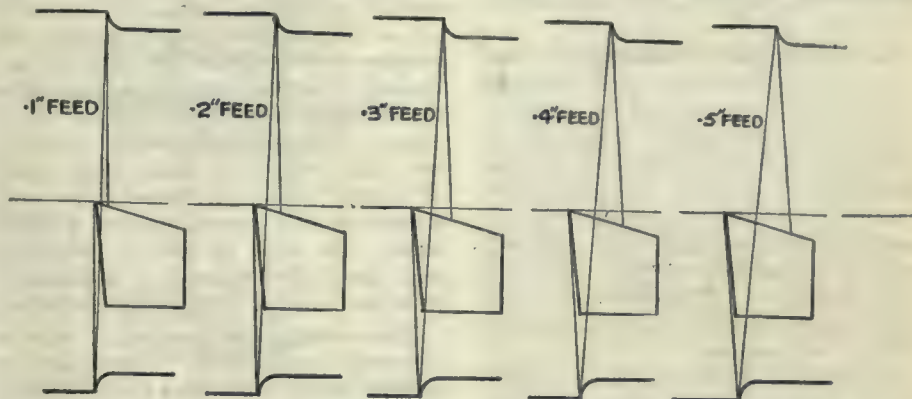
DIAGRAM SHOWING RELATION BETWEEN SIDE CLEARANCE ON A LATHE TOOL AND RATE OF FEED. THE TOOL SHOWN IN EACH CASE HAS SIX DEGREES OF CLEARANCE, WHICH IS AMPLE FOR MUCH MORE THAN THE HIGHEST FEED RATE ANY TOOL WOULD STAND.
